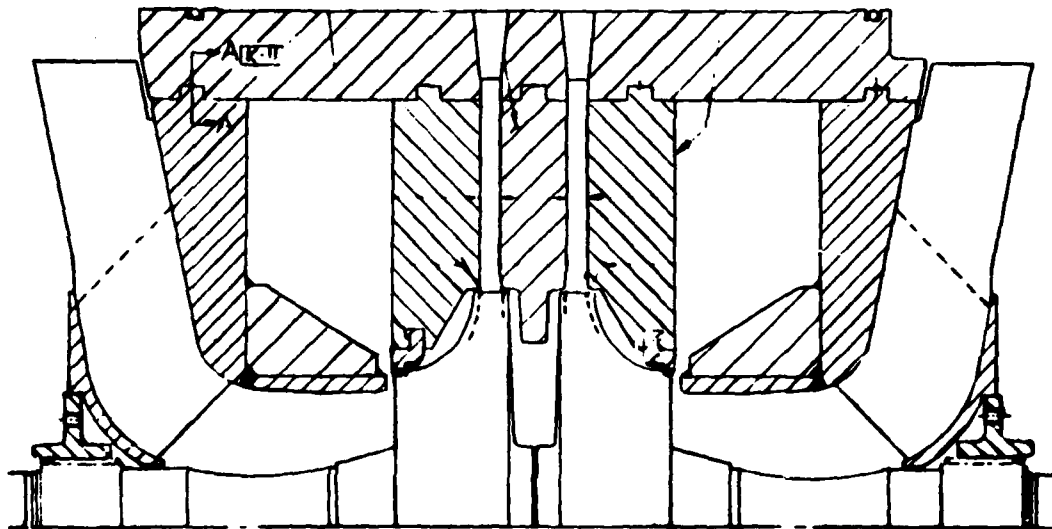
Rotor mid-section showing diffuser elements in cross-section
